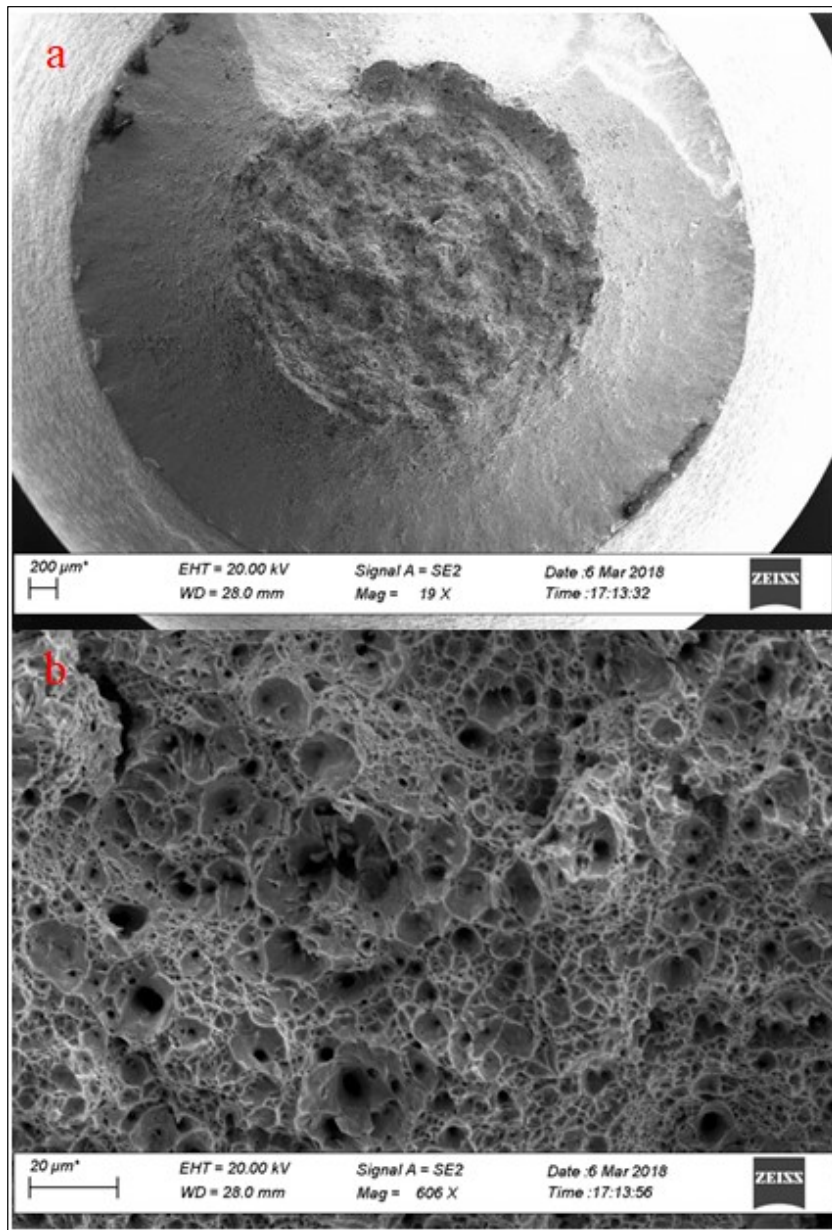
SEM micrograph showing (a) general view of fracture surface (b) equiaxed dimples on fracture surface of tensile tested specimen (SP-21)
